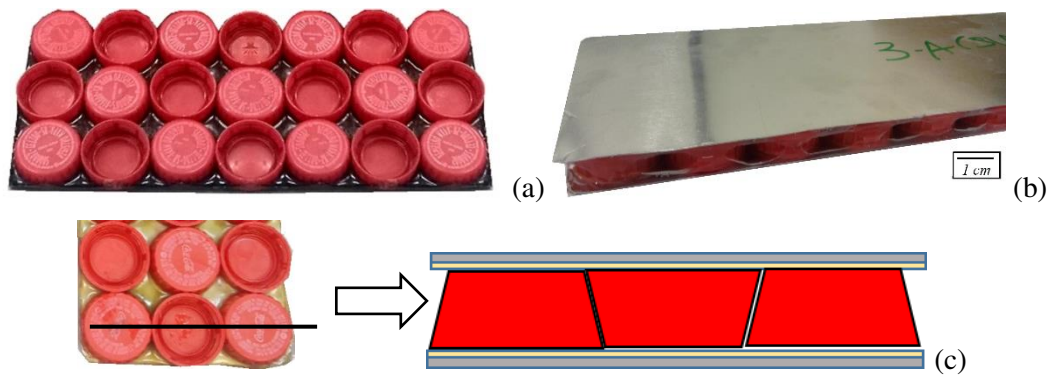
View of bottle caps honeycomb core with alternated configuration (a), manufactured samples with bottle caps (b), and cross-sectional diagram of alternated bottle caps panel (c).
